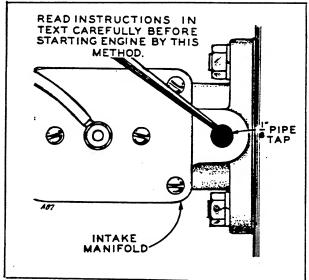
USING MOTOR OIL OR ETHER TO START THE UNIT
